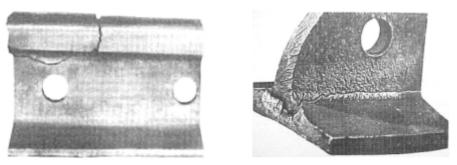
Horizontal crack at top and bottom fillet radius
